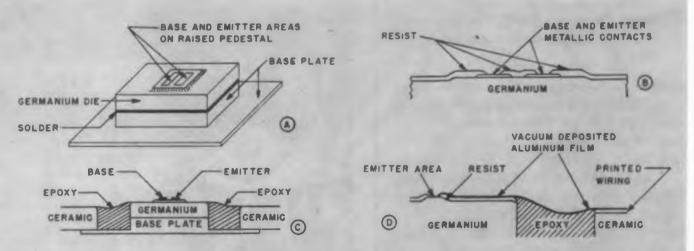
Steps in connection of a diffused-base transistor to wiring on a printed circuit board starting with transistor soldered to base plate (a). Cross section view (b) of surface after exposure of photo resist, (c) cross-sectional view of transistor in place on the board, and completed unit (d).
